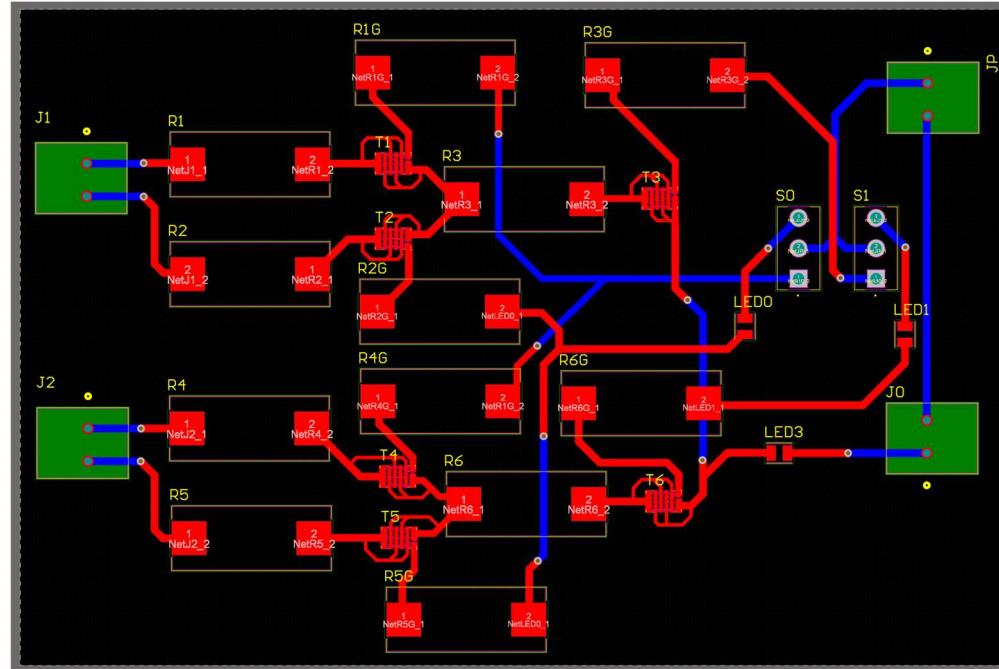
4:1 MUX Altium Designer PCB Layout Revision 1
